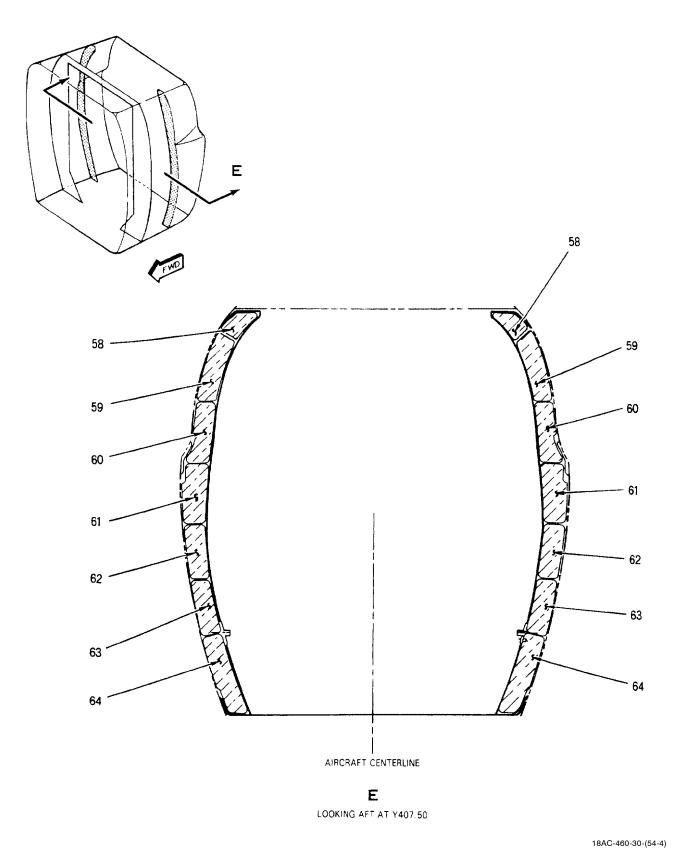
No. 2 Fuel Tank Cavity Foam Filler - 161742 AND UP (Sheet 4)
